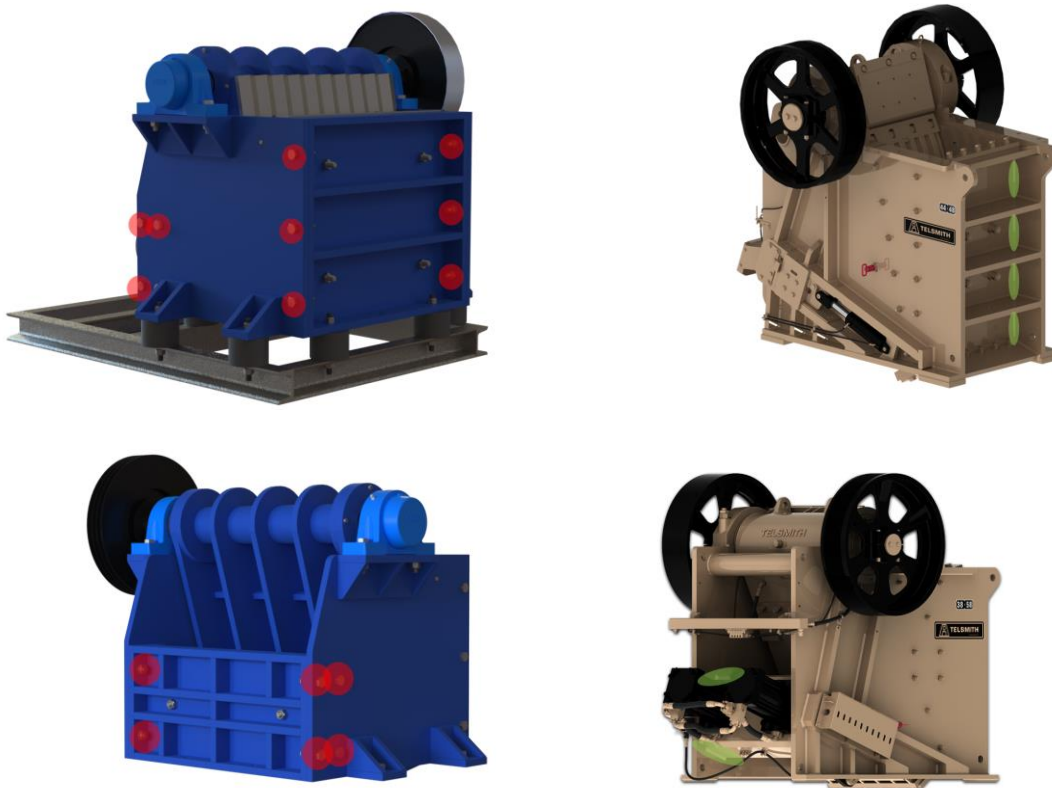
Bolted Connections of Jaw Crusher Concept(left) shown in red and Welded Connections of Typical Jaw Crusher(right) shown in green [24]
